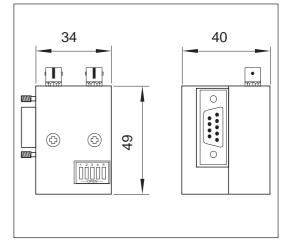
Dimensional drawing of bus connection module SPA-ZC 21.
